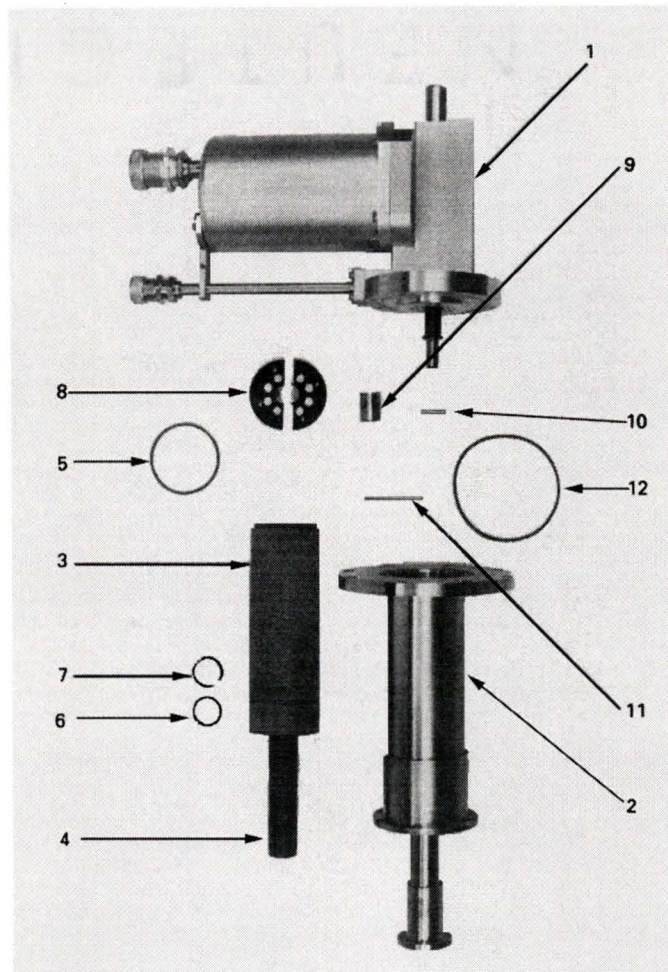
shows a picture of the cold head. The cylindrical enclosure at the top contains the drive unit subassembly. The combined displacer unit is enclosed by two concentric stainless steel cylinders.
